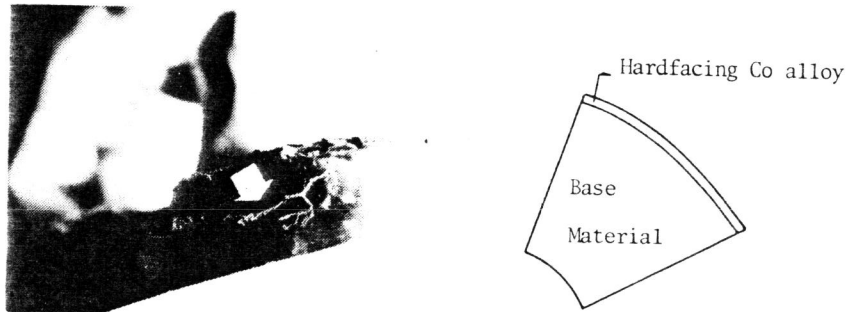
Surface cracks within the shaft body starting at the wear resistant overlay (left).
